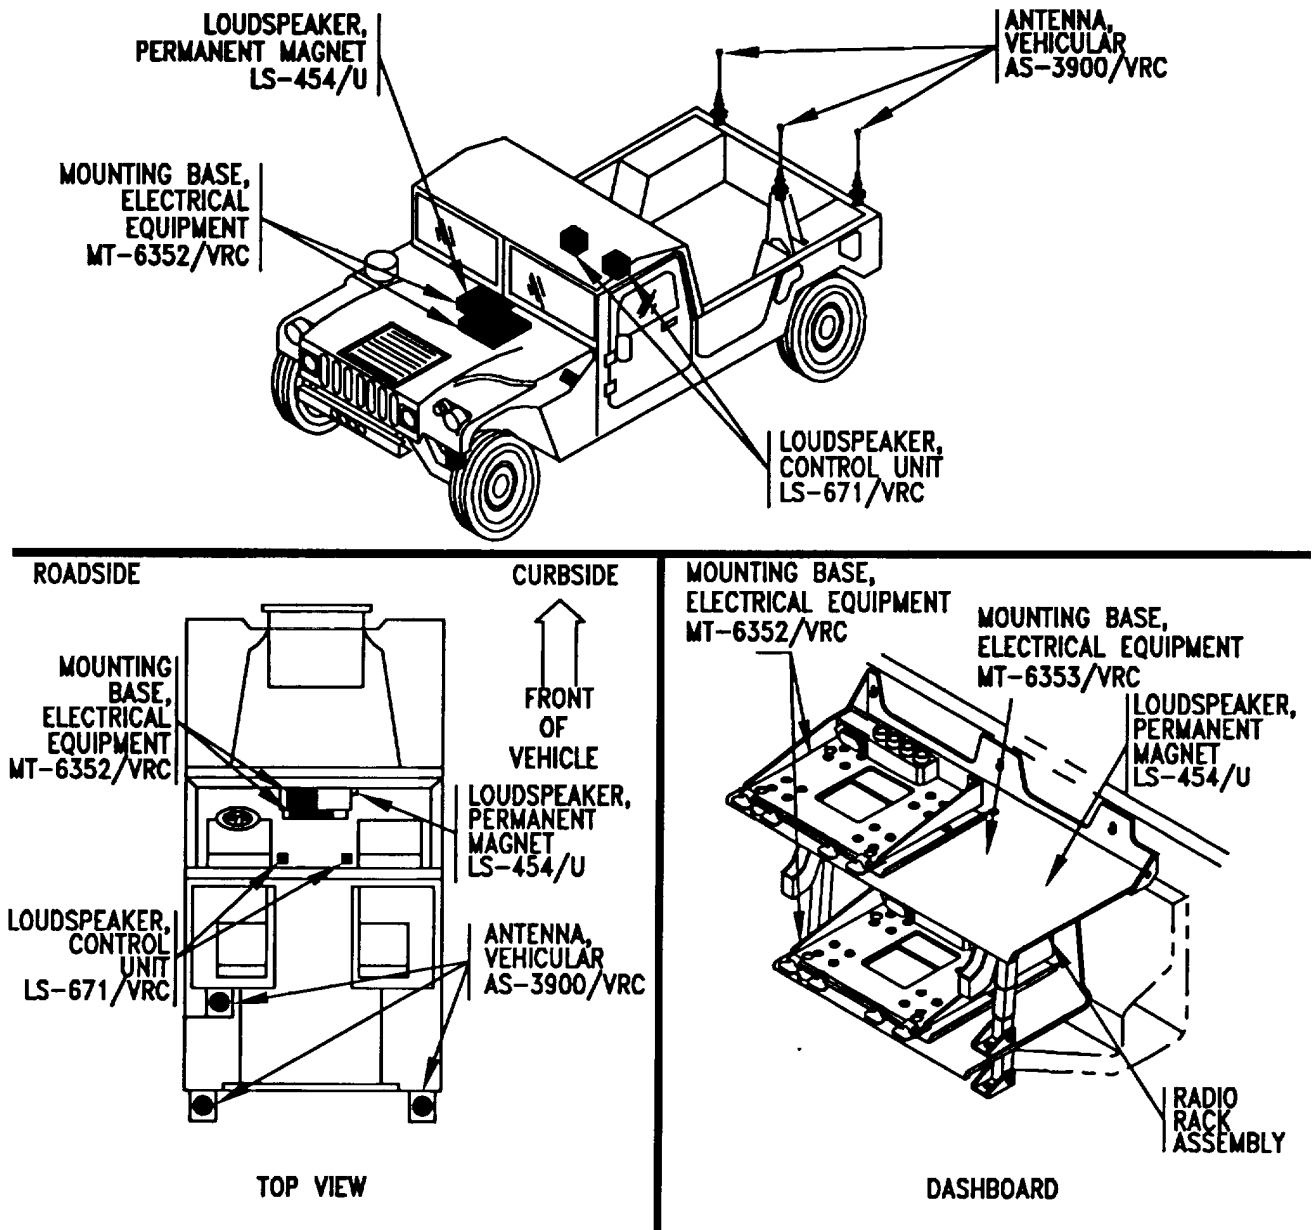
(1). MK and Radio Installation: MK Equipment Locations
